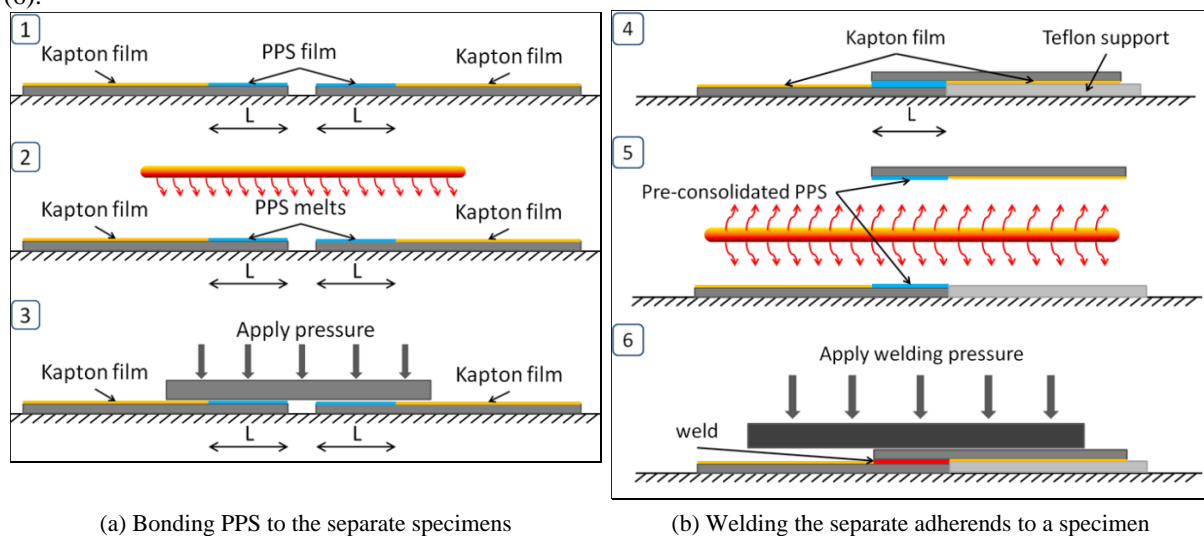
Welding procedure, illustrated for a lapshear specimen
